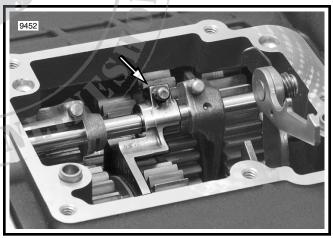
Install 1-2 Shifter Fork Onto Shift Ring
